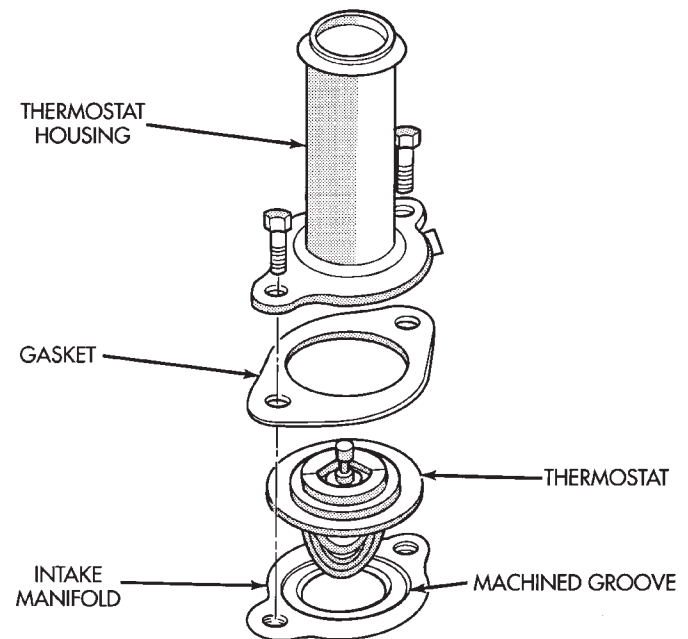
Thermostat—3.9L V-6 or 5.2/5.9L V-8 Gas Engines
